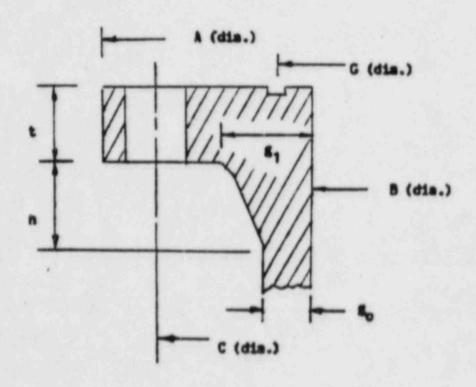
FLANCE (Ref: ASME B & PV Code, Figure XI-3120-1)
